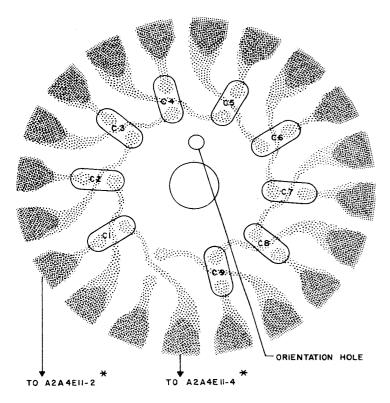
100 KC Rotor Assemblies (Component Side Down), Component Location
